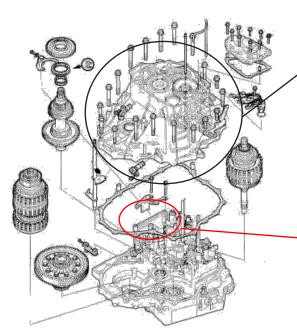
Remove all necessary bolts and shaft nuts, (most shaft nuts are staked in place, a chisel or stake cutter is required), then split the case. Some gear train components may also need to be removed.
